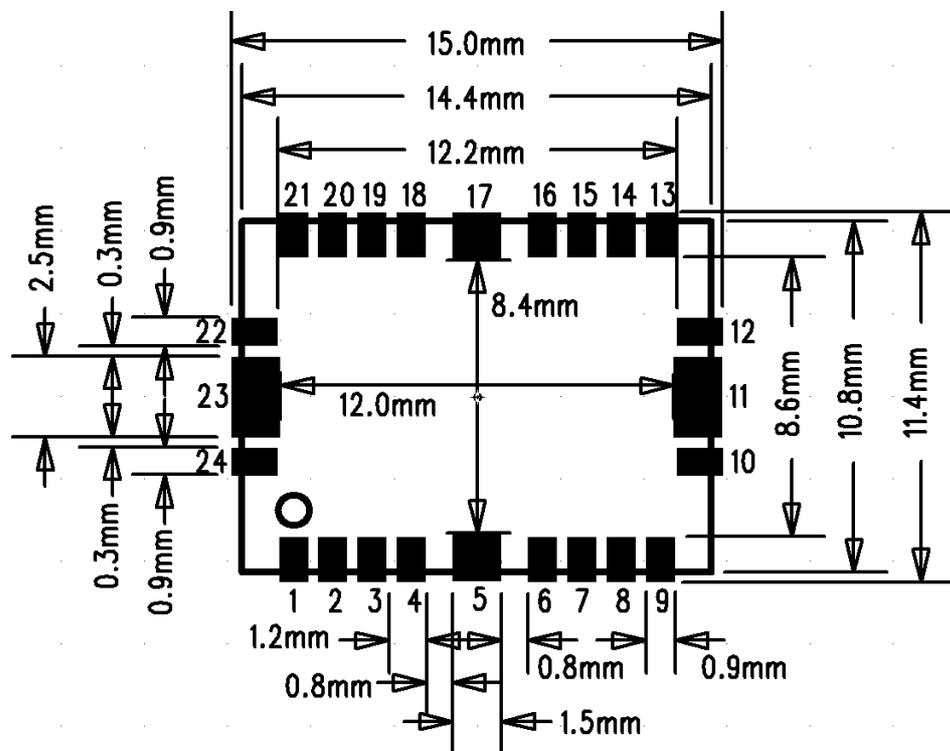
Suggested pad layout, occupied area and pin out, top view.
